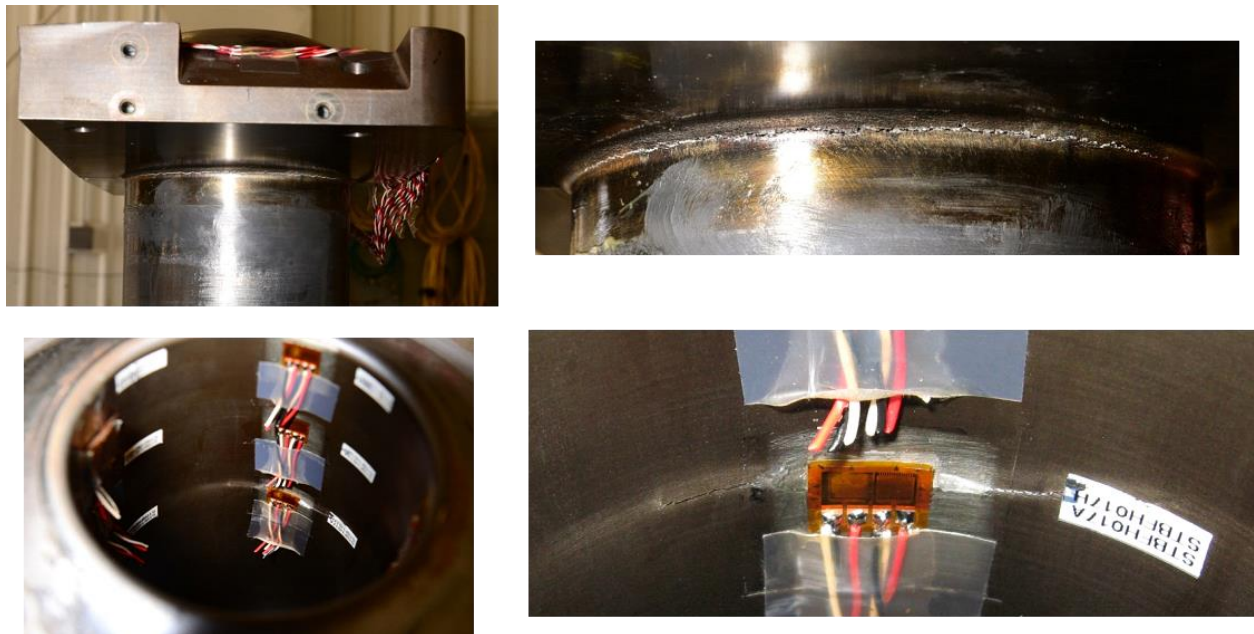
Crack at Ball Fitting Radius on FSTA-1.
